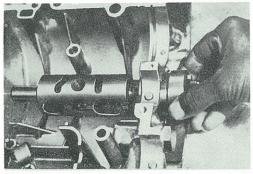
Slipping gear shifting cam out of crankcase
